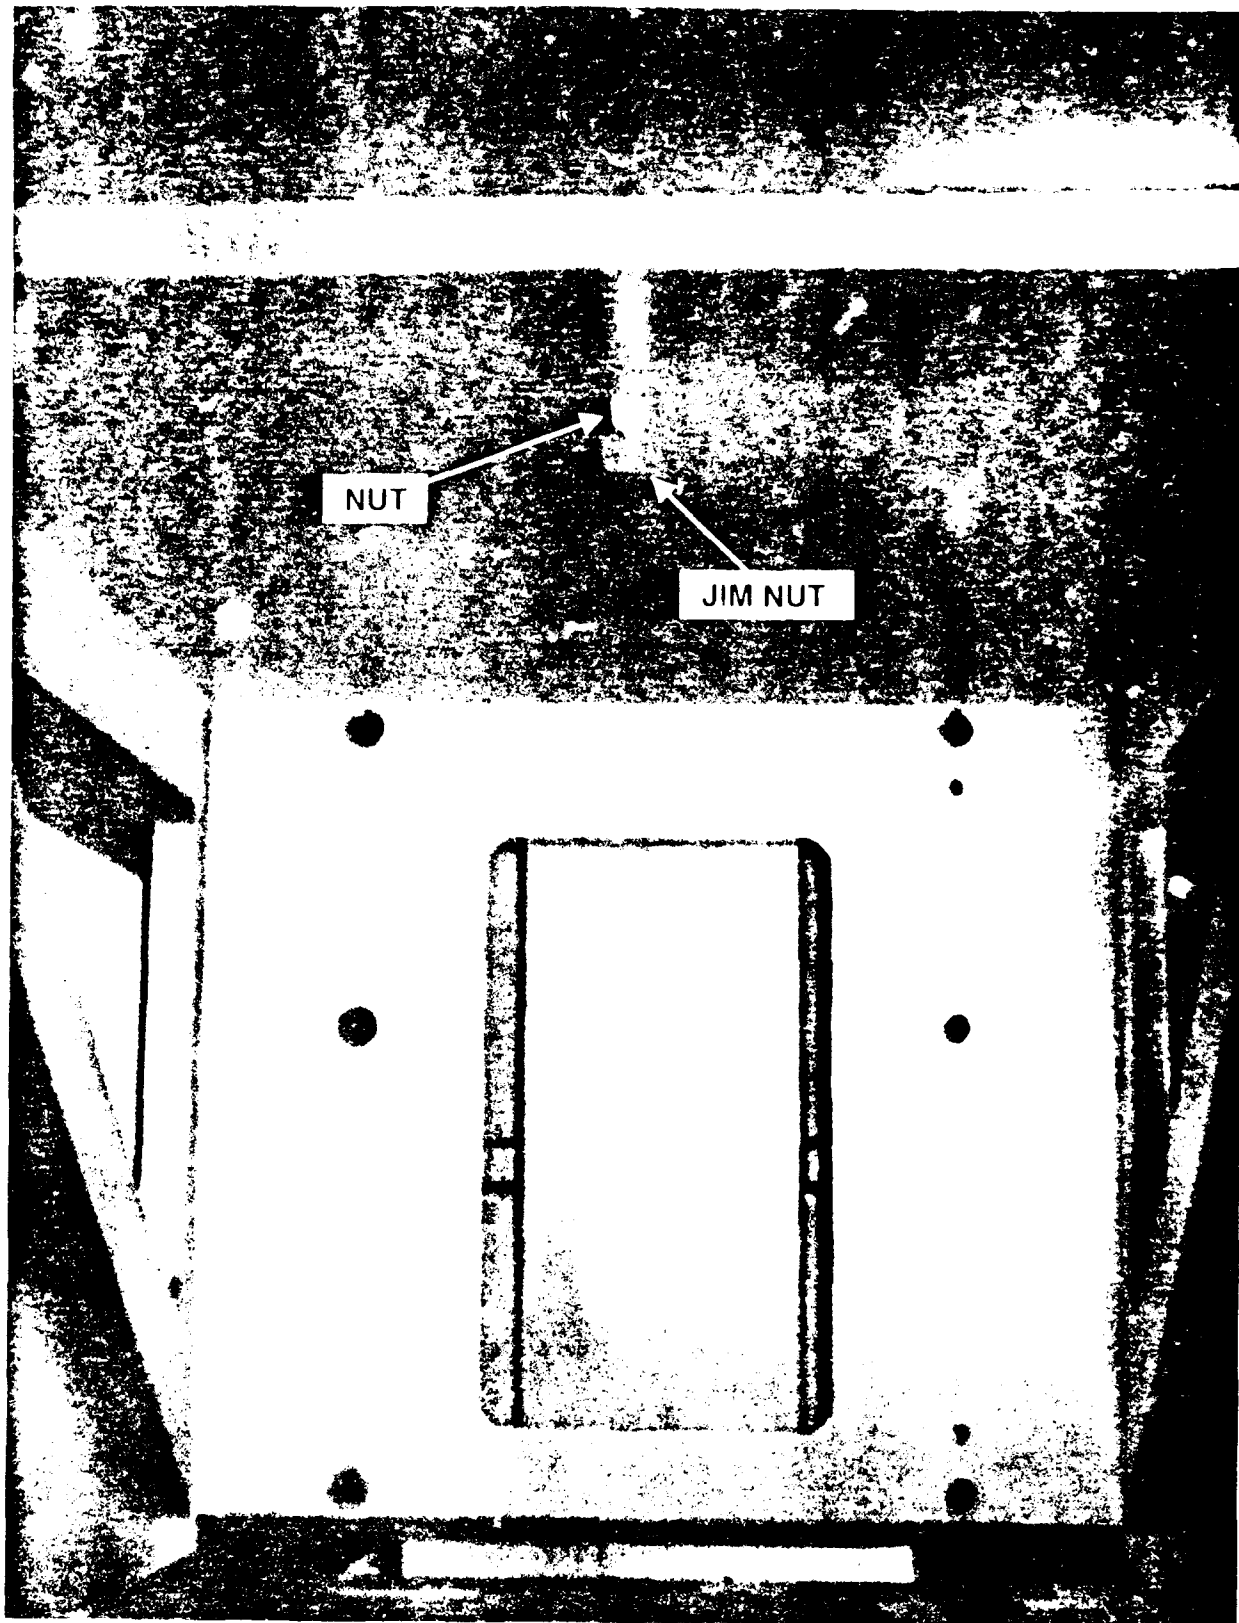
TABLE SIDE - WIRE ROPE ADJUSTMENT
